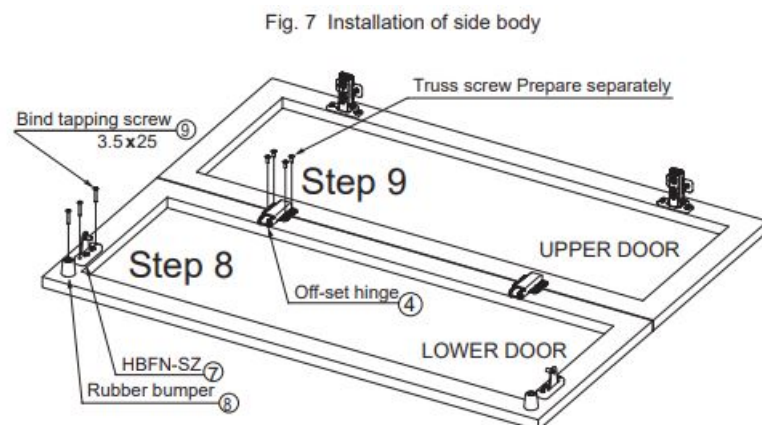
Installation of HBFN-SZ mounting plate and off-set hinge
